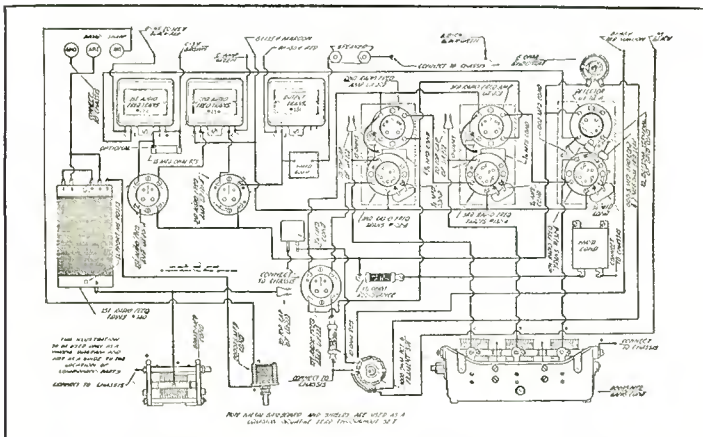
This drawing represents the graphic method of making connections in wiring up the receiver
